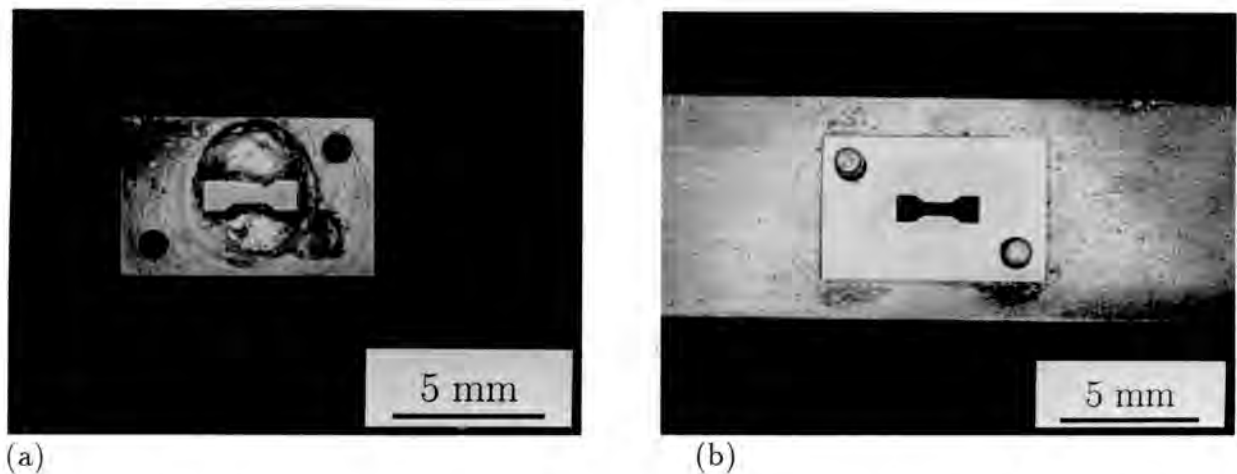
Punch (a) and dye (b) used to produce microtensile specimens.
